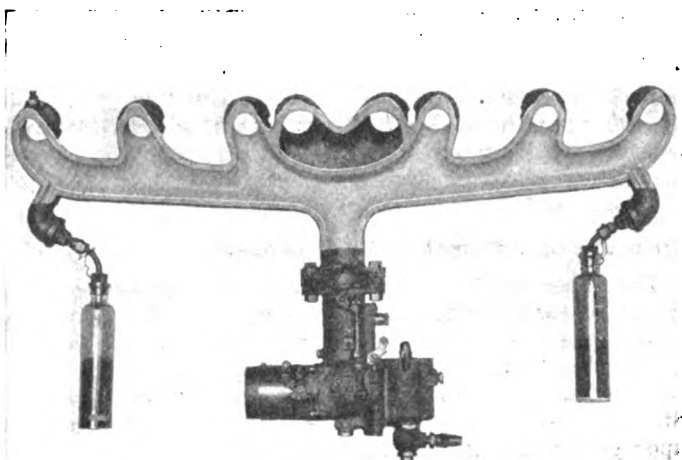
Admission pipe of a six-cylinder engine in which the two exhaust ports at the center form a hot-spot immediately above the carburetor inlet
